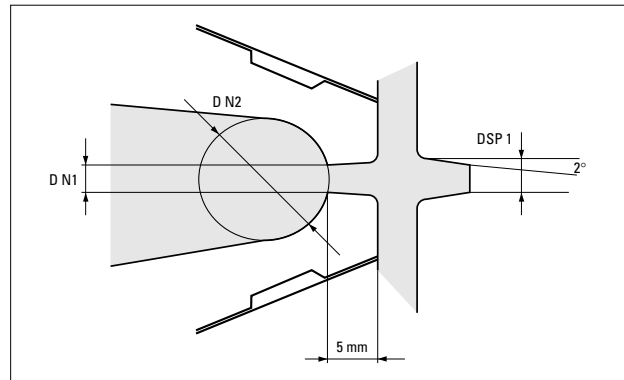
Example of a design of a nozzle without sprue used with 3 plate moulds. Remember that for DELRIN® the nozzle temperature should not exceed 190° C
